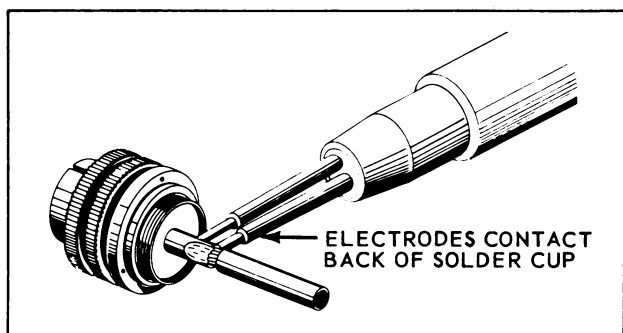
Resistance Soldering Pencil for Small Contacts
